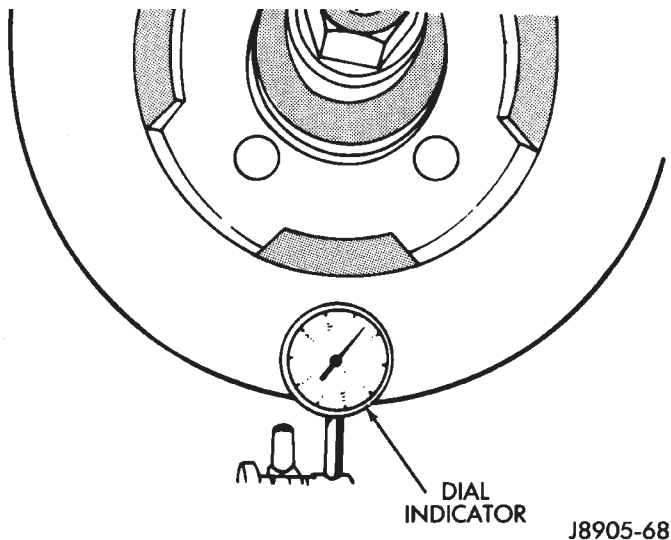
Typical Method Of Checking Rotor Lateral Runout
